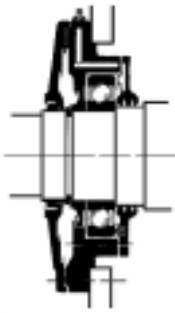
Bearing cooling pipe system for forced-oil lubrication
